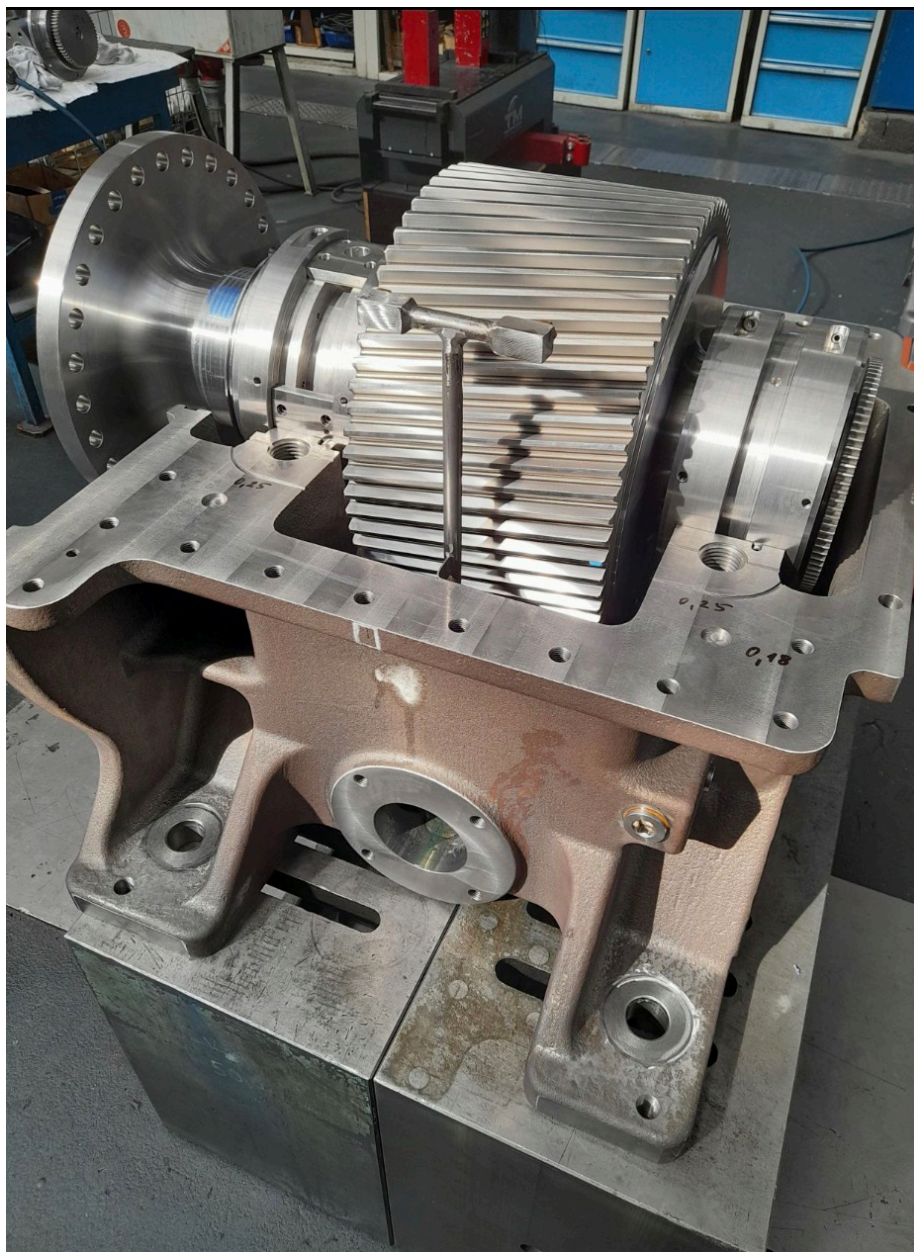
Gearbox assembly under inspection. Heavy-duty gear and shaft assembly during fitting and inspection. Long-term reliability depends on evaluating the complete system rather than replacing the gear alone.
